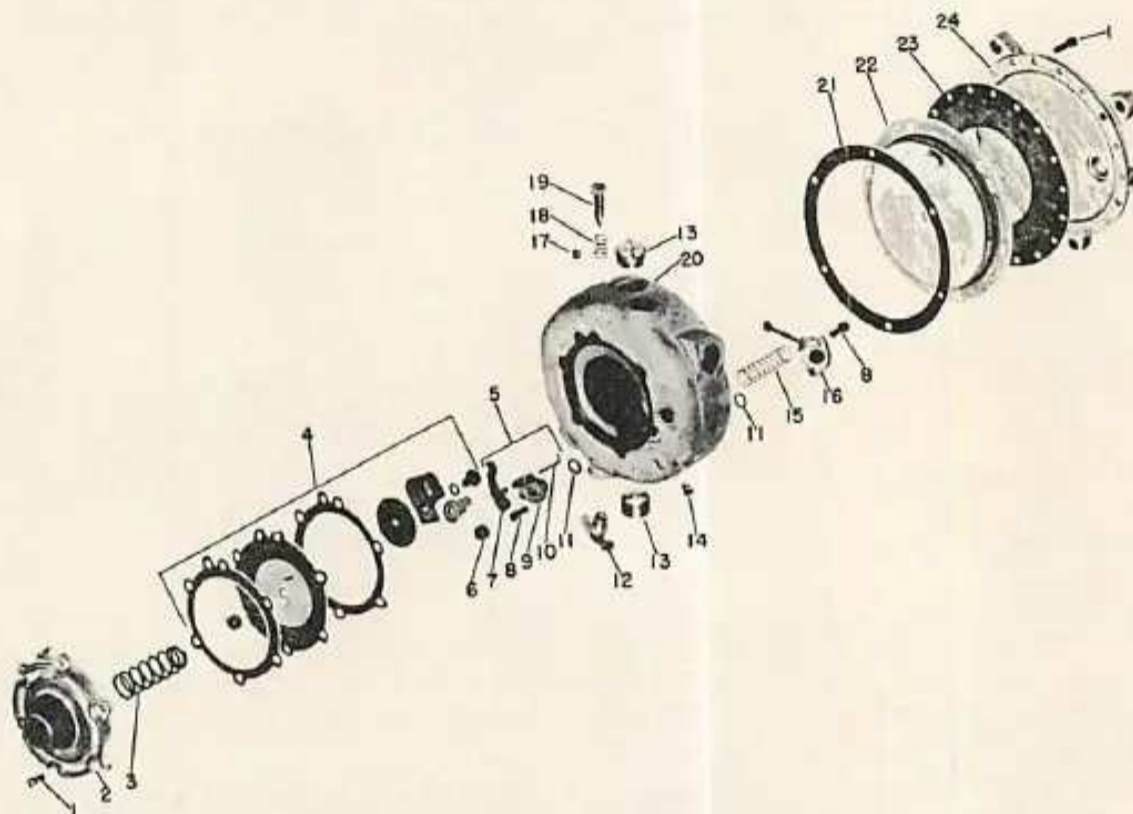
Exploded view of the Bosch-Ensign regulator used on Series 1650 and late Series 1600 tractors. Refer to Fig. O76 for views showing construction and adjustment points.
